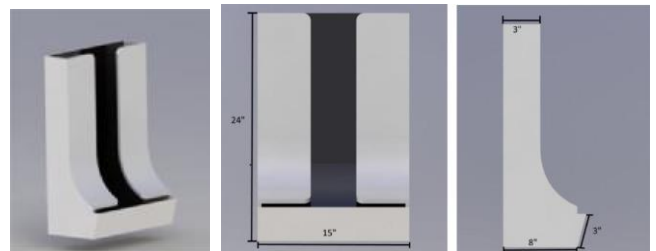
Front View, Right Side View & Isometric View of Hanger Box
